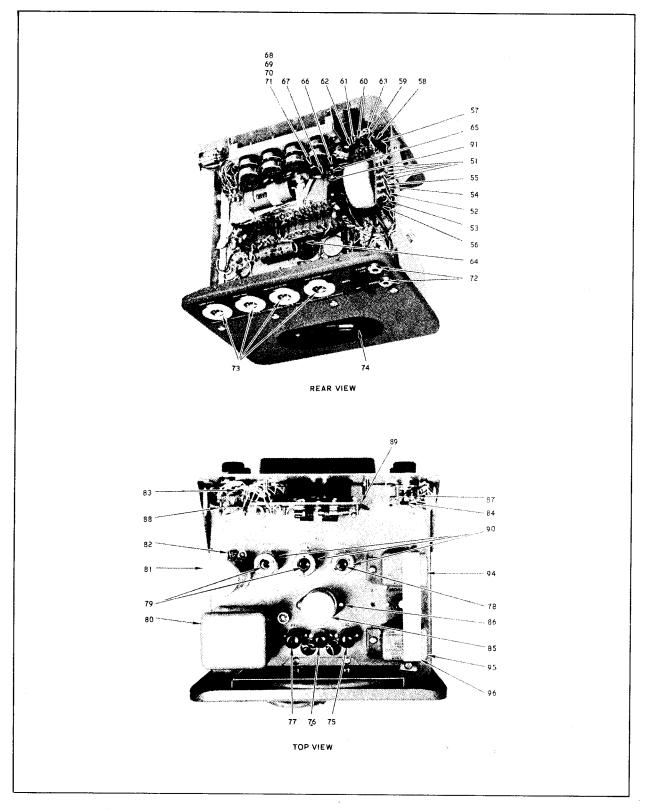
Vibration Meter Type 1-117-0105, Location of Parts (Sheet 2 of 2)
